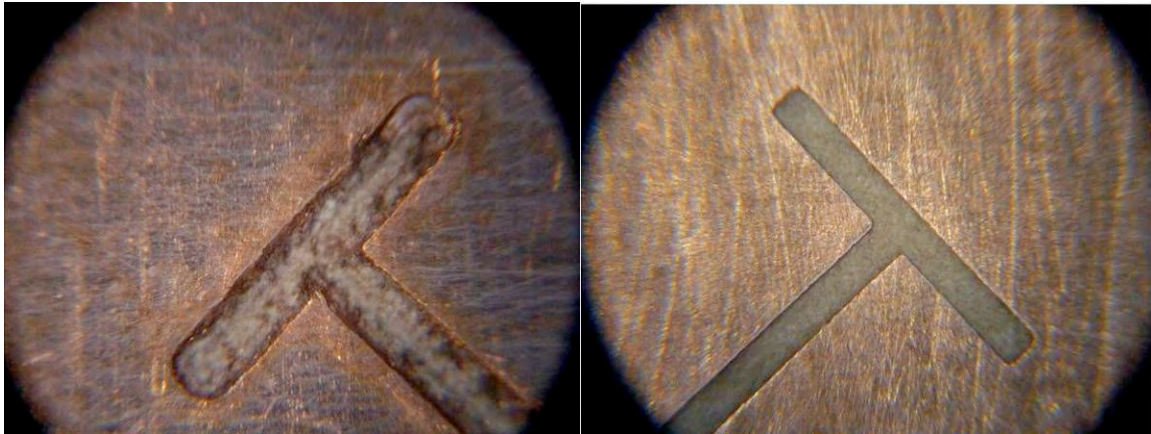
Coupling aperture made with milling machine (left) and etched (right).
